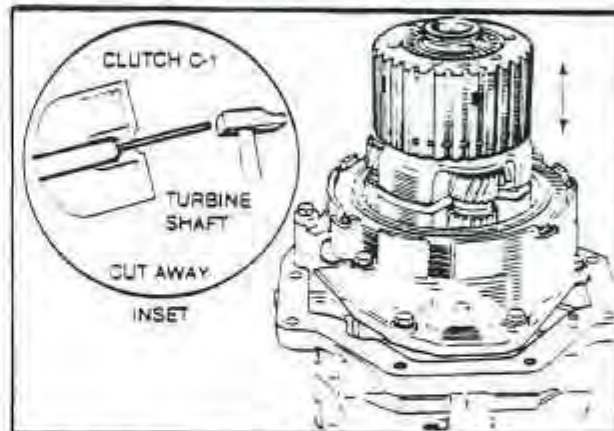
CLUTCH C-1 AND TURBINE SHAFT REMOVAL
